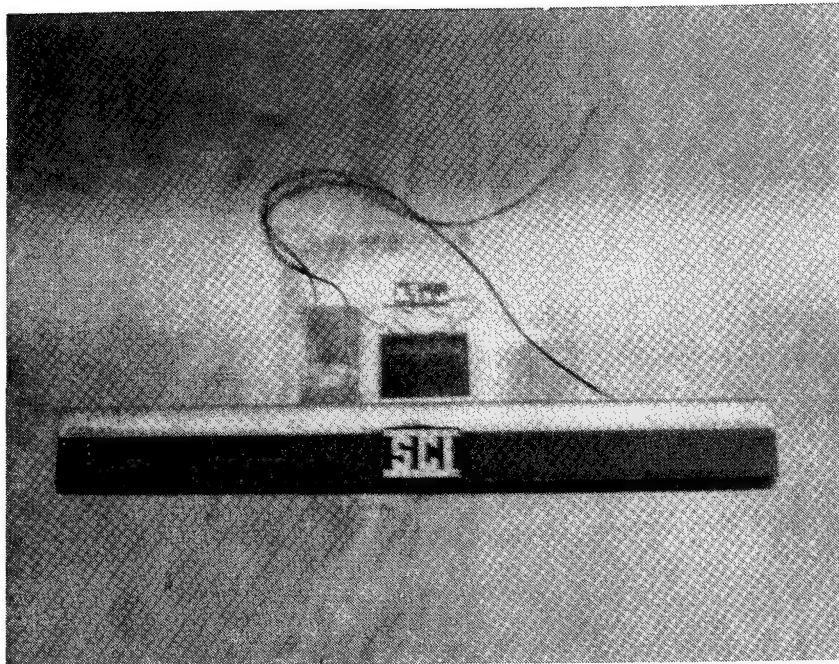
Completed Full-Scale Mandrel Support Fixture
